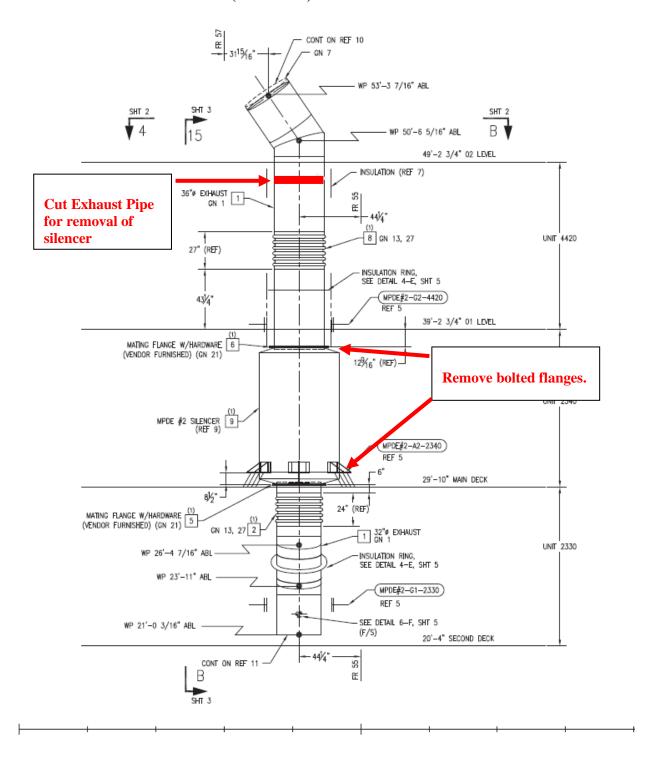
EXHAUST PIPING CUT OUT LOCATION FOR SILENCER REMOVAL
